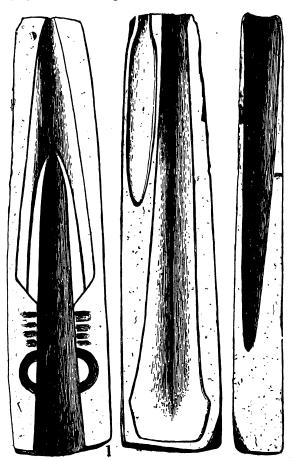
Half of mould for casting spear-head and dagger, Killymeddy, Co. Antrim $(\frac{1}{2})$.
